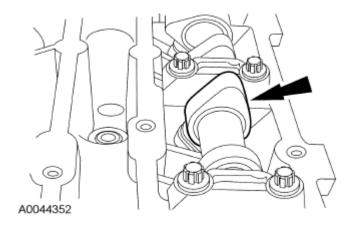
Locating Camshaft Lobes Courtesy of FORD MOTOR CO.
